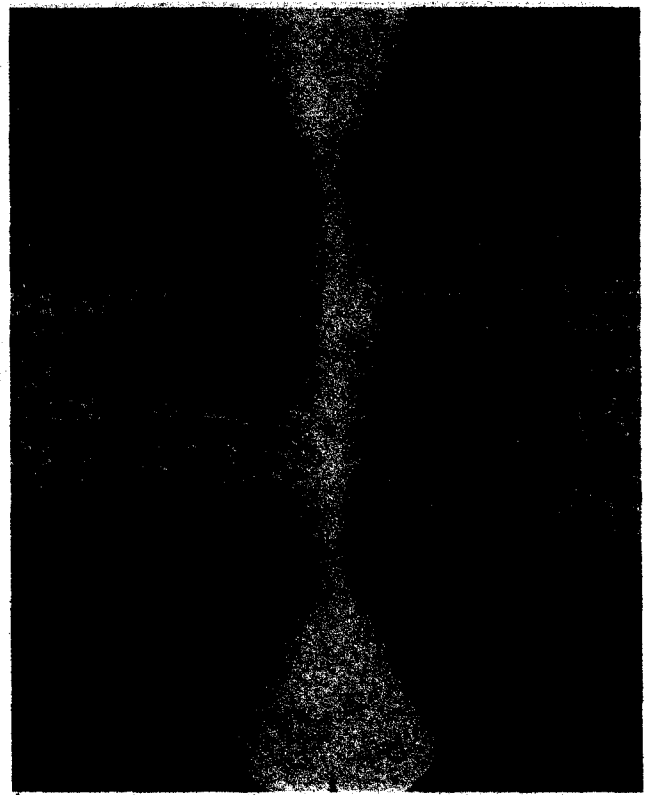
Single Upset Cold Weld in Type 1100 Aluminum Wire
